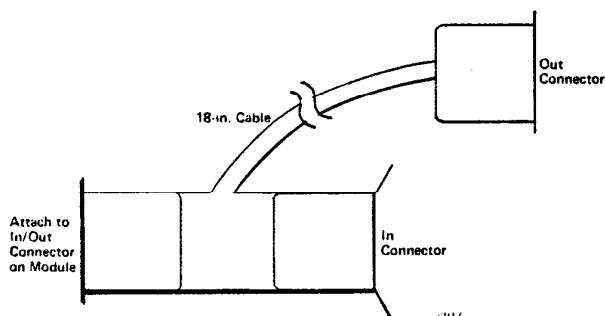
Detail of 772-C1 Printing System Cable.
